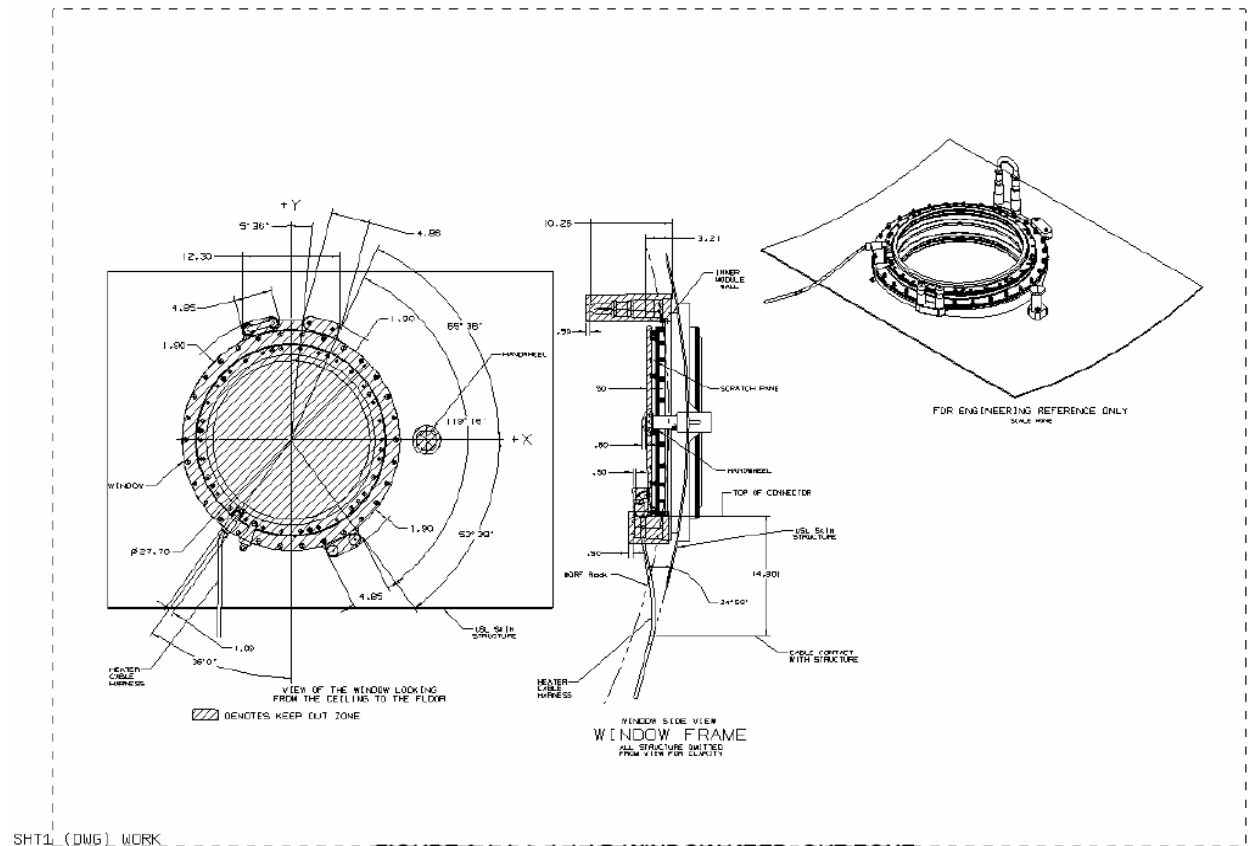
LAB WINDOW KEEP-OUT ZONE (PAGE 2 OF 2)
